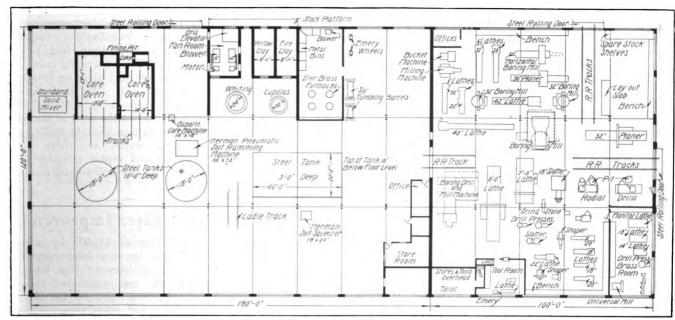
LAYOUT OF FOUNDRY AND MACHINE SHOP, AMERICAN SHIP BUILDING CO.
